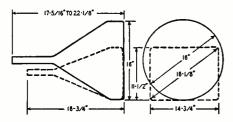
While picture size is about the same, the rectangular tube has smaller overall dimensions than the round tube.
